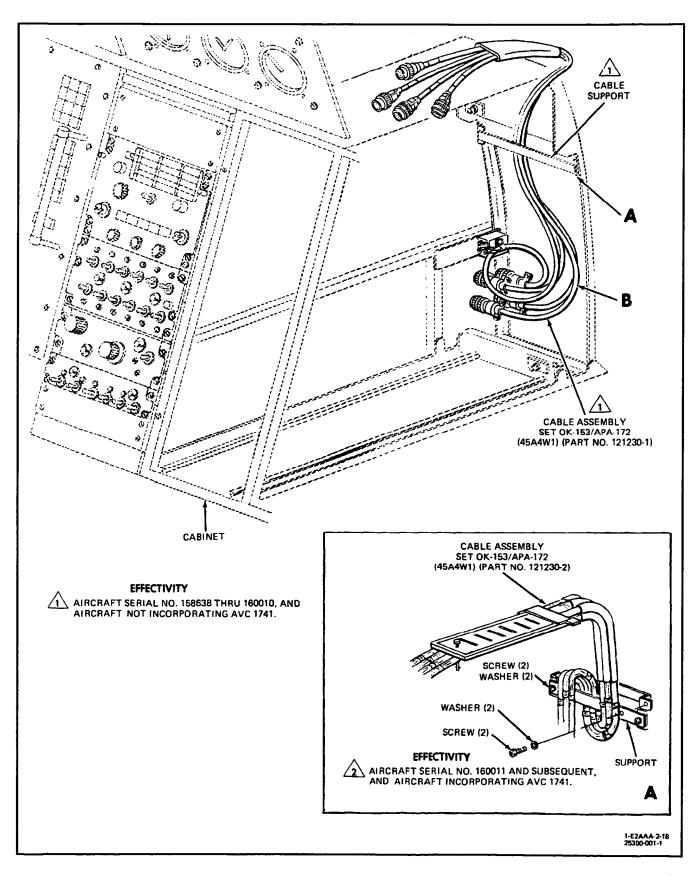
Removal and Installation of Cable Assembly Set and RFI Filter (Sheet 1 of 2)
